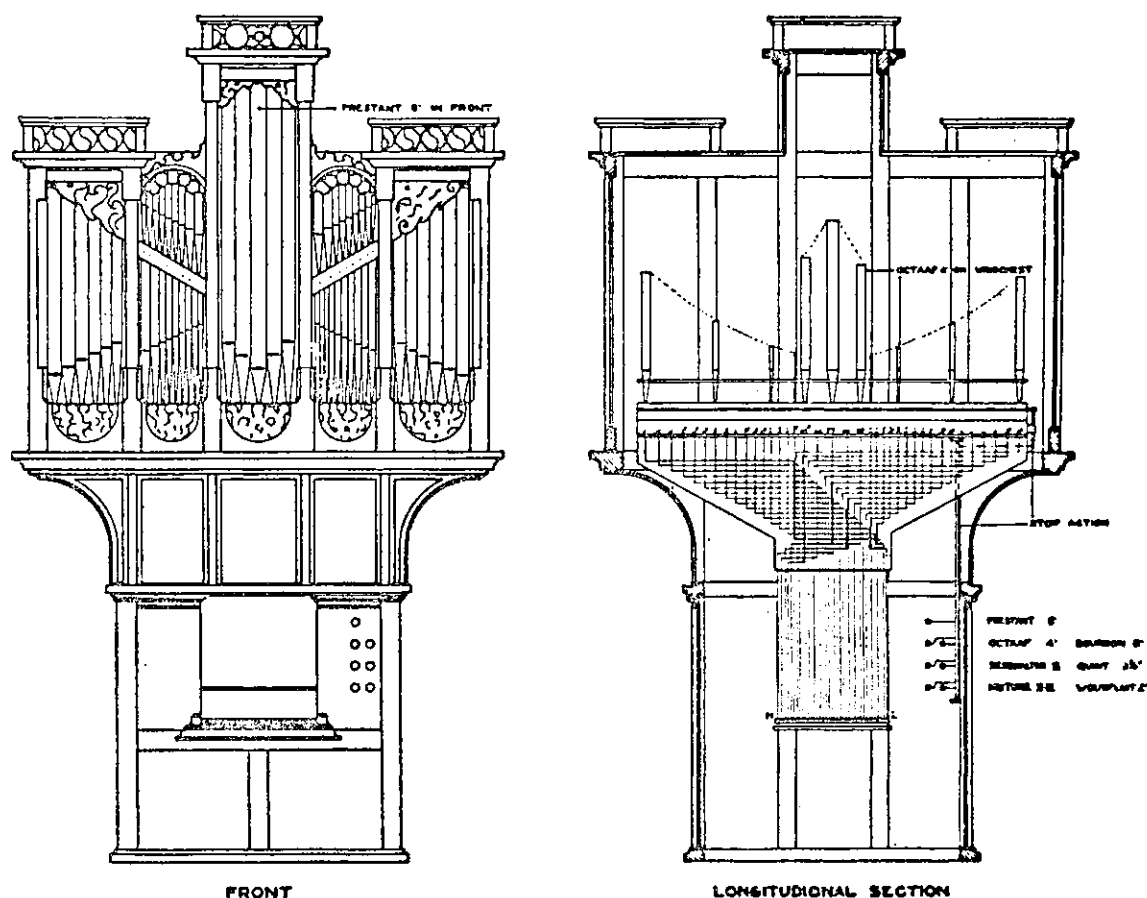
Elevation and longitudinal section of Oosthuizen organ.⁸
